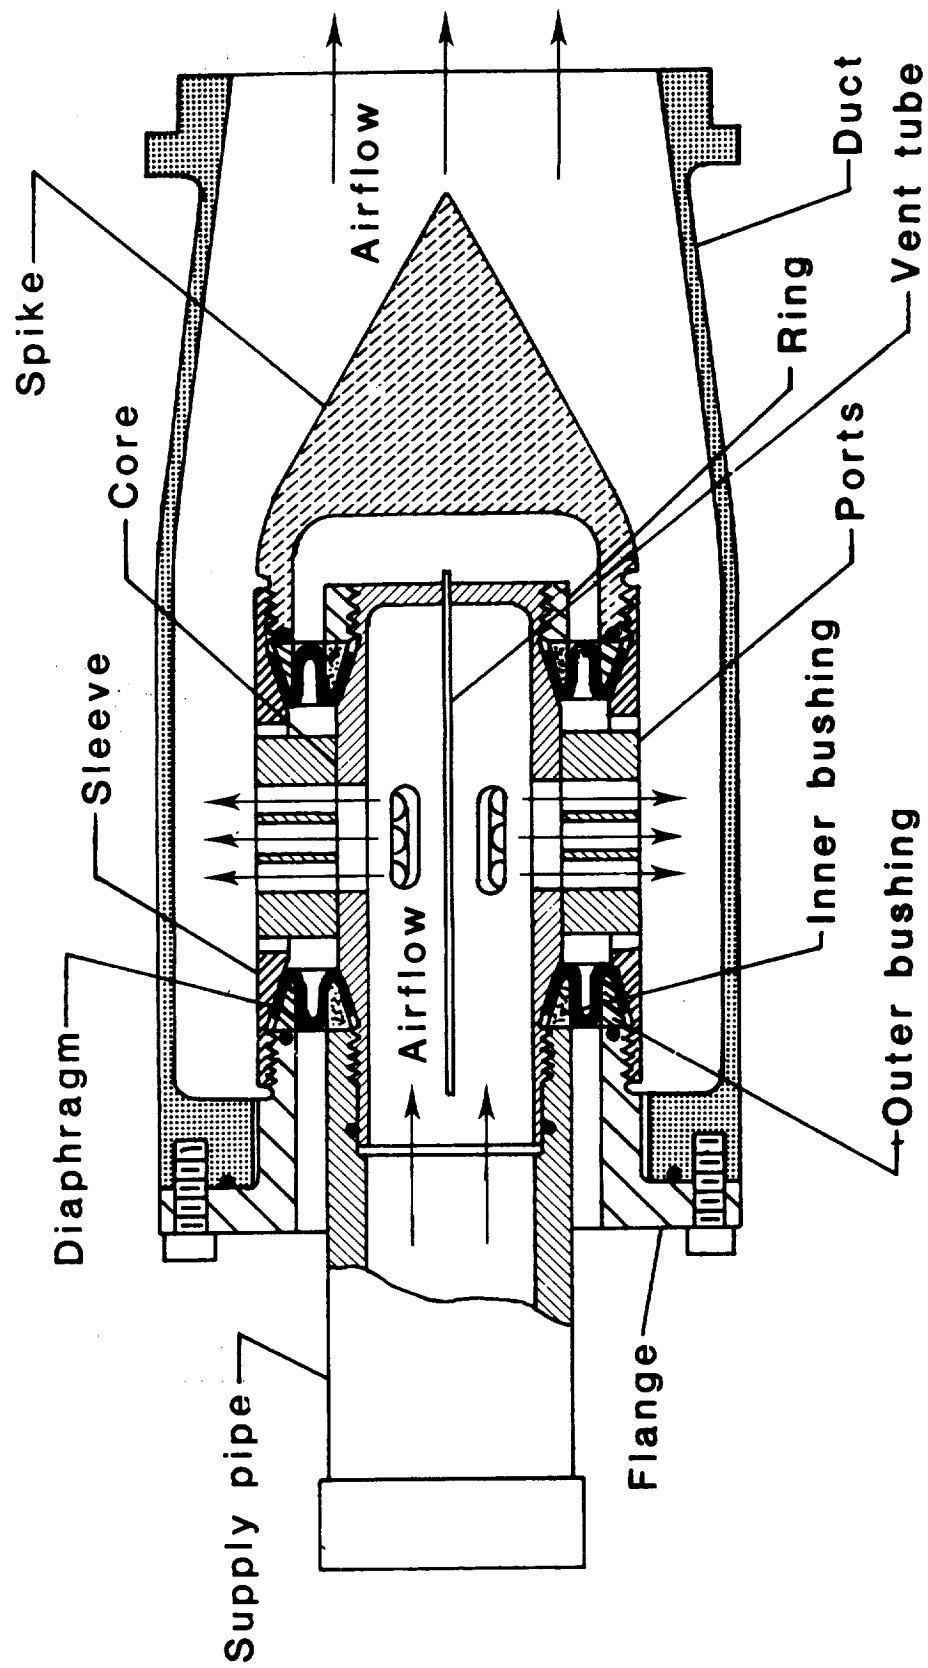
Sketch of typical flow transfer assembly showing fabric bellows installed.
